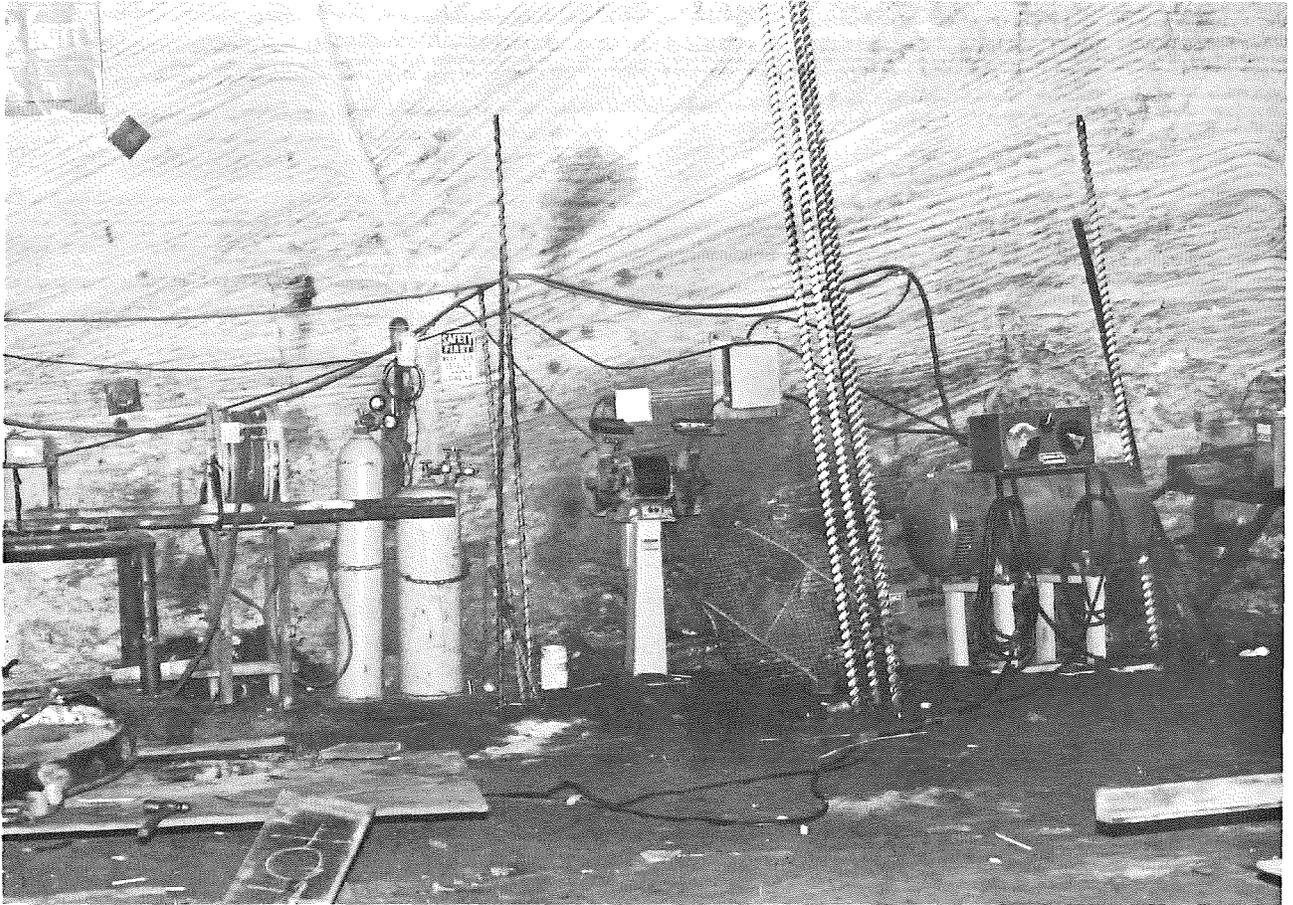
Underground mine welding facility which is equipped for cutting, edge preparation and welding.
